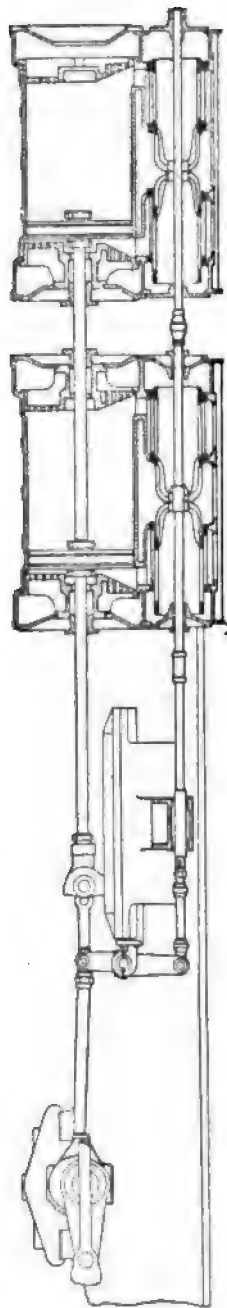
CHARGING-PUMP GEARING OF THE SIEGENER MASCHINENBAU-AKTIEN-GESELLSCHAFT.
